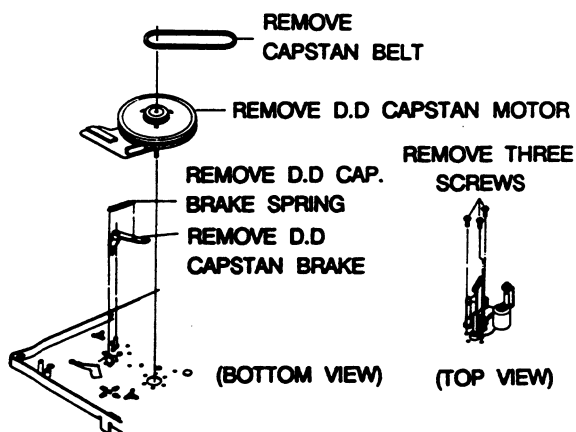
Capstan Motor and Capstan Motor Brake Removal
